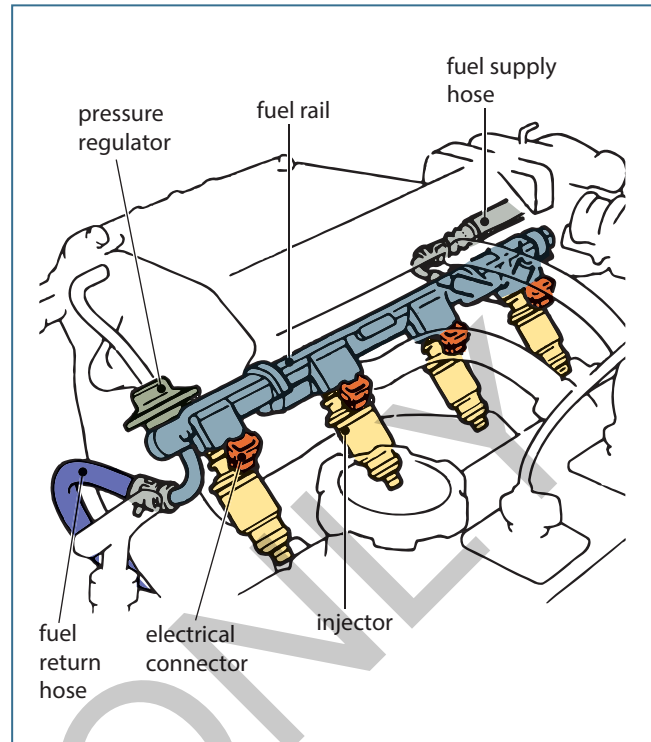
Fuel rail and injectors for a four-cylinder engine TOYOTA
